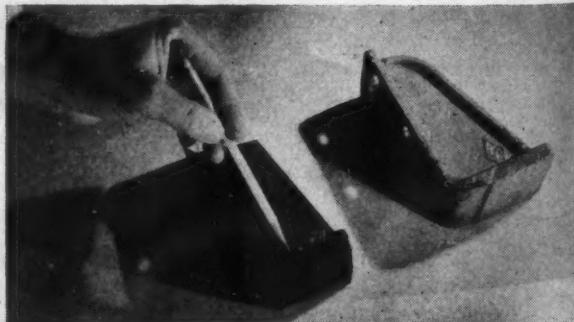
Overload spring bumper bracket has been welded and re-machined to provide a new wearing surface
